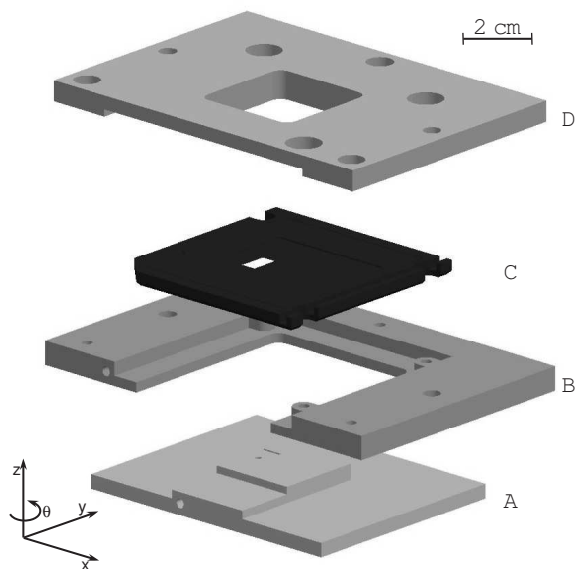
Exploded view of the jig used to connect chip-cables to chips. A chip is initially accommodated in the lower holder (A) while a chip-cables, in its frame (C), is sandwiched between the cable holder (B) and the mask (D), which keeps the cable flat. The whole system is subsequently aligned by means of a specific tool.
